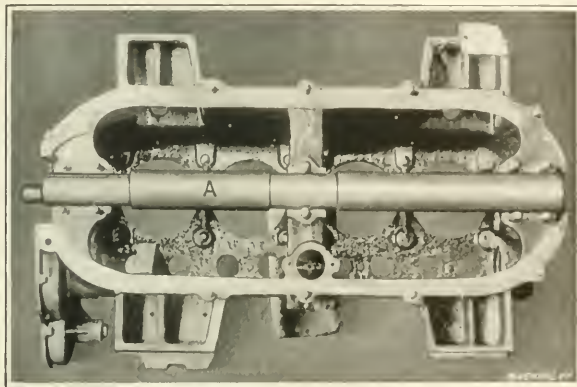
Same Crank-case as shown in Fig. 6 with End Bearing and Mandrel in Place
